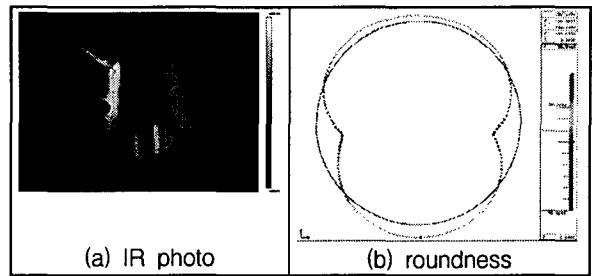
Infrared ray photo of welds and roundness of housing after MIG pulse arc welding
